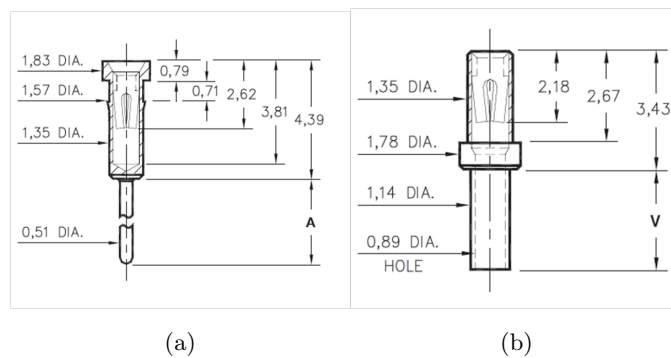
All dimensions are in mm. a) 0133 Press fit pin receptacle, dimension A = 9.7 mm. b) 0672 Pin receptacle, dimension V = 3.71 mm.
